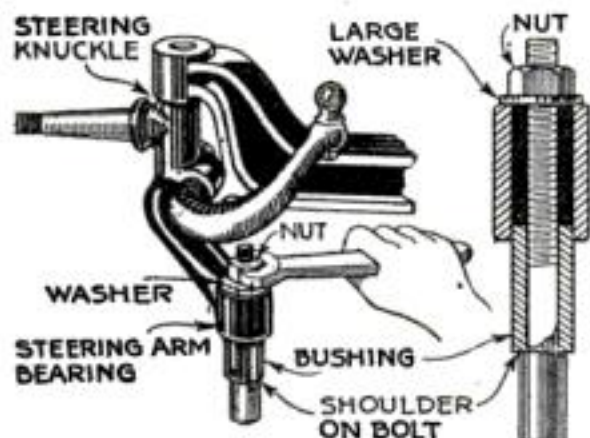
Simple method of forcing bushing into place, using special bolt with nut and washer.
